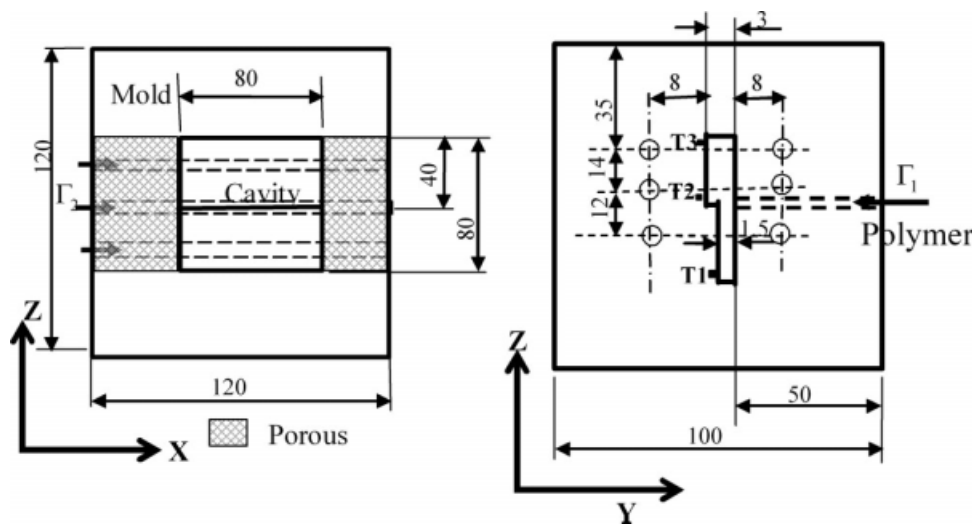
Configuration of the mold, mold cavity, and cooling channels (dimensions mm).
